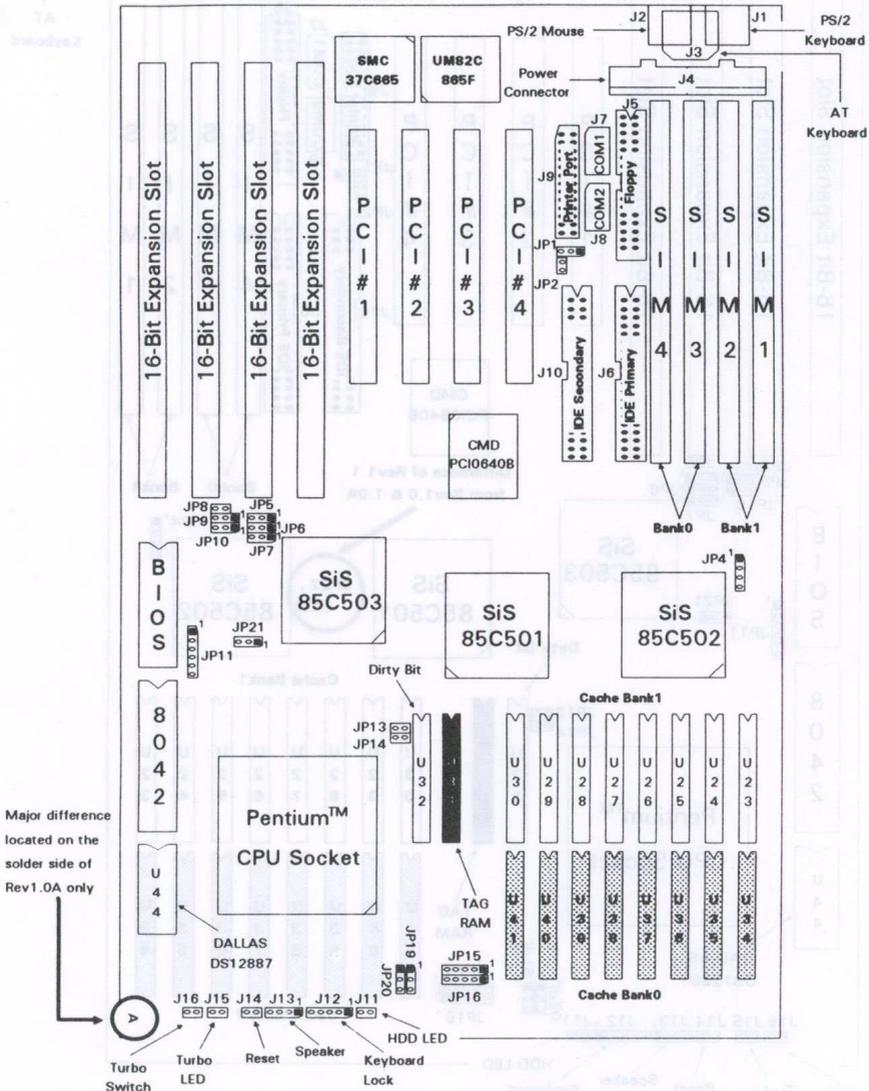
SI5PI AIO Mainboard Layout (PCB Rev. 1.0 & 1.0A)
